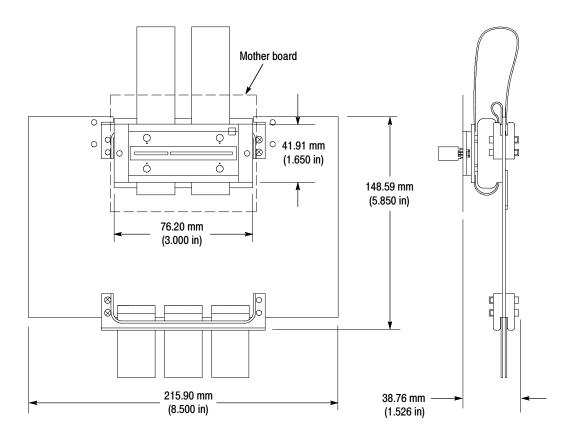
shows the dimensions of the AGP 3.0 Backside probe head.
